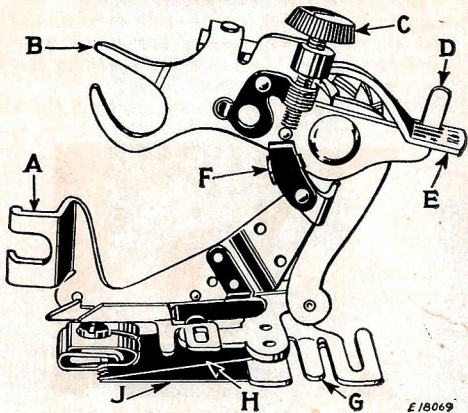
PRINCIPAL PARTS OF THE RUFFLER
